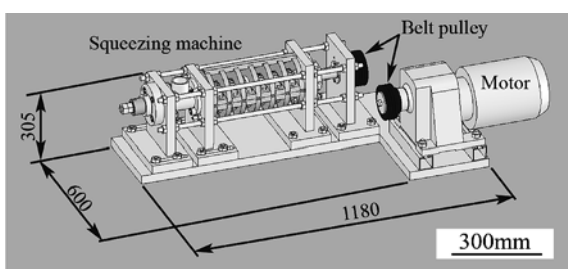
3D-CAD image of rapeseed oil squeezing machine
